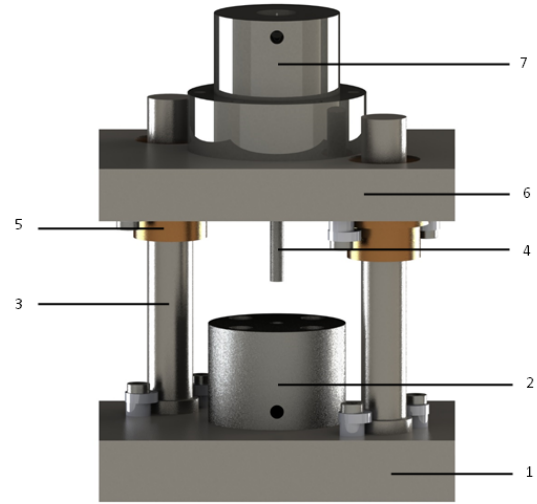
ECAP tool CAD: 1 - Tool base; 2 - ECAP die; 3 - Guide; 4 - Punch; 5 - Bushing; 6 - Top platen; 7 - Connection to the press.
